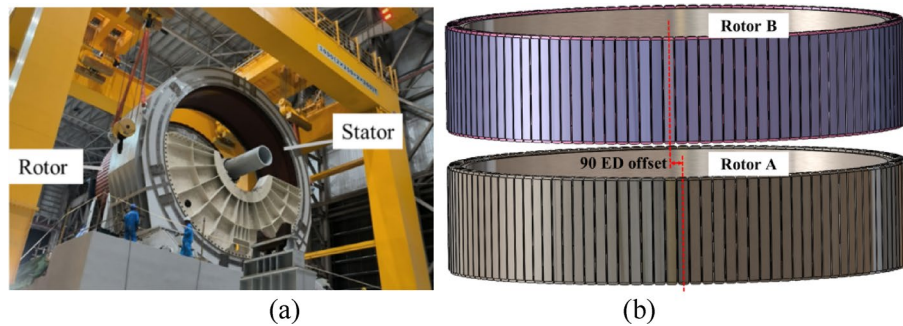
WFSDM. a Prototype. b Rotor structure.
